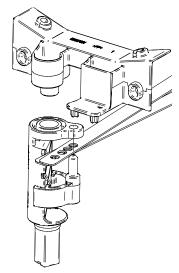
It is also possible to e.g. lock one side using the mechanism above.
